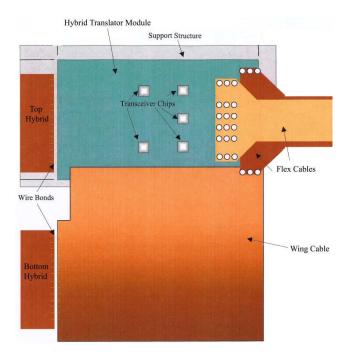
HTM assembly showing the wing cable to connect the top and bottom side boards and the readout flex cable.
